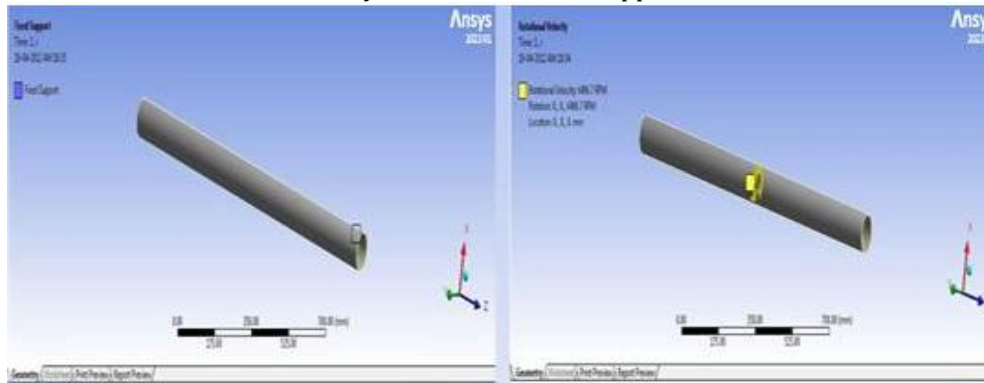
Finite element model of Carbon/Epoxy shaft
